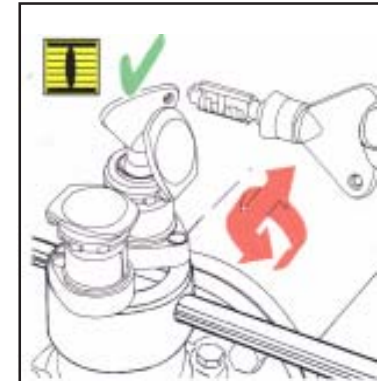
Check operation:- close valve and remove key, lock valve. Reinsert key.
